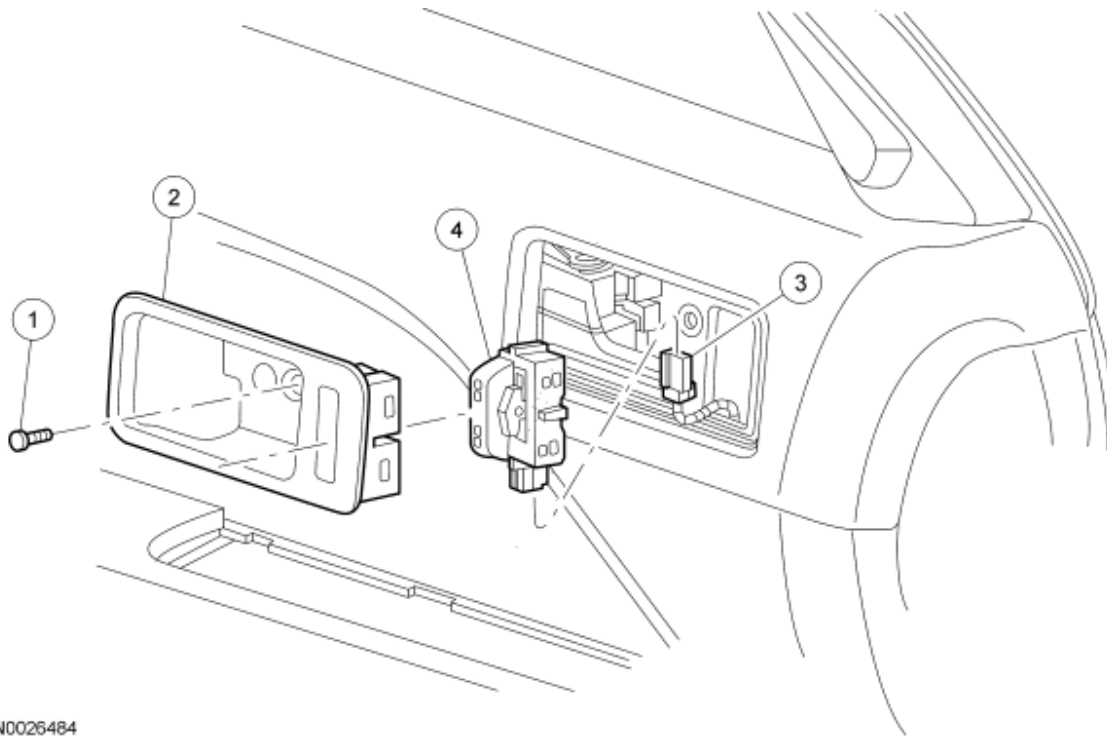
Exploded View Of Luggage Compartment Lid Lock Cylinder
